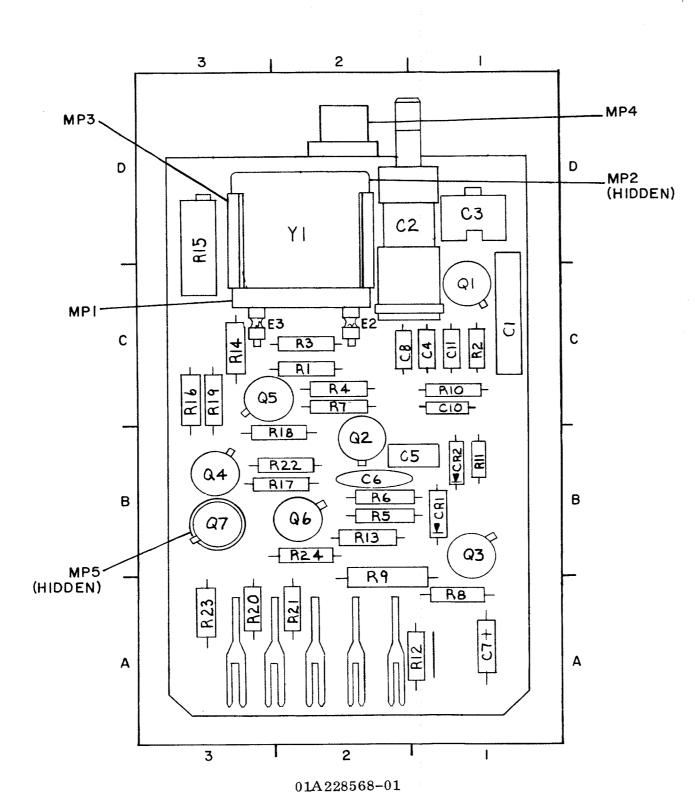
Frequency Standard Assembly A2A5, Housing Removed, Top View, Component Locations
